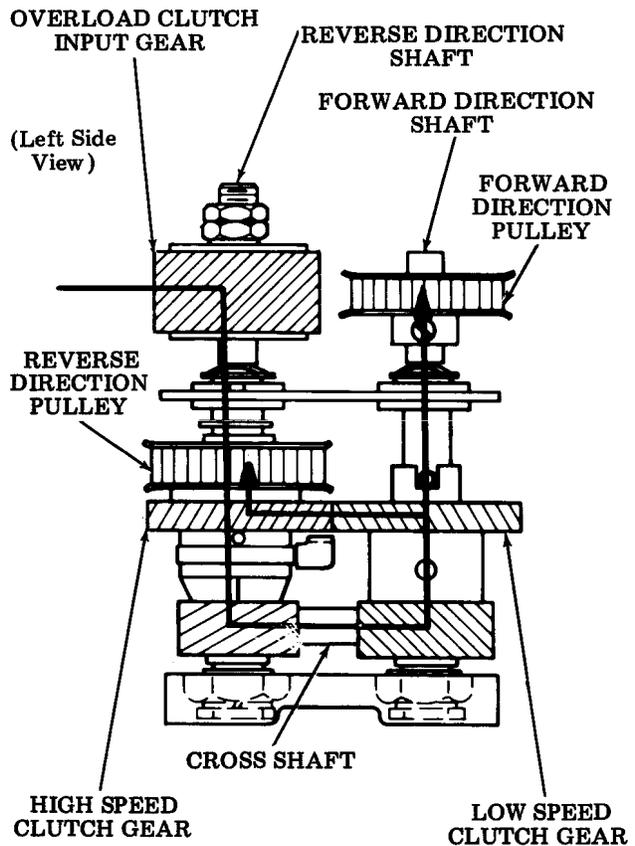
Gearshift Mechanism (Low Speed Operation)
